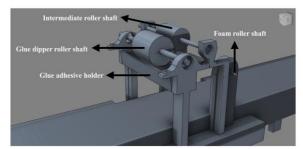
The Intermediate Stage Roller Operation Parts are Described.
